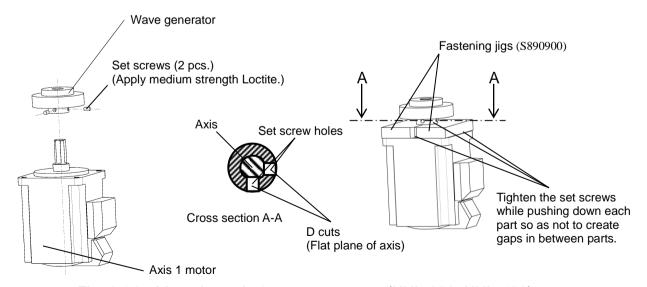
Mounting axis 1 wave generator (KHL-300, KHL-400)
